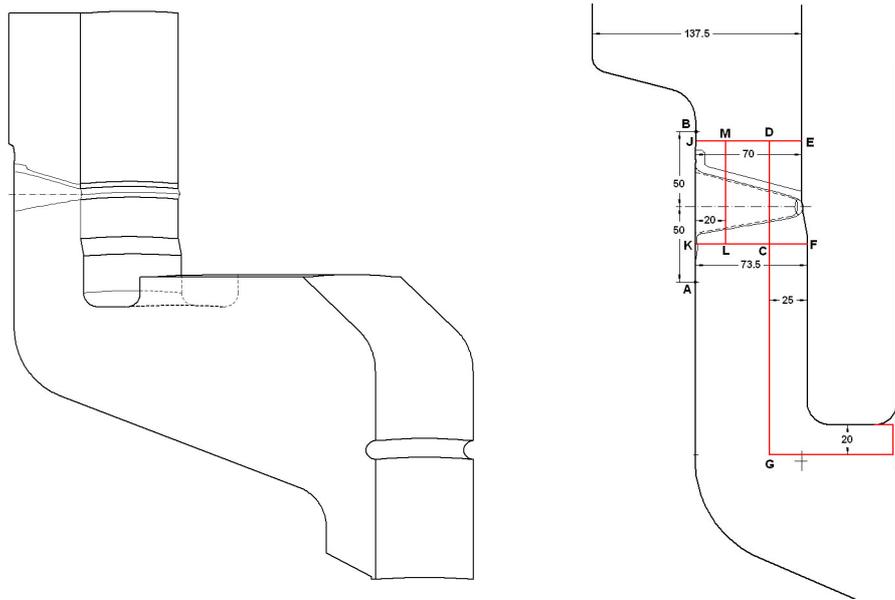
Steam generator collector dissimilar metal weld geometry and inspection target.
